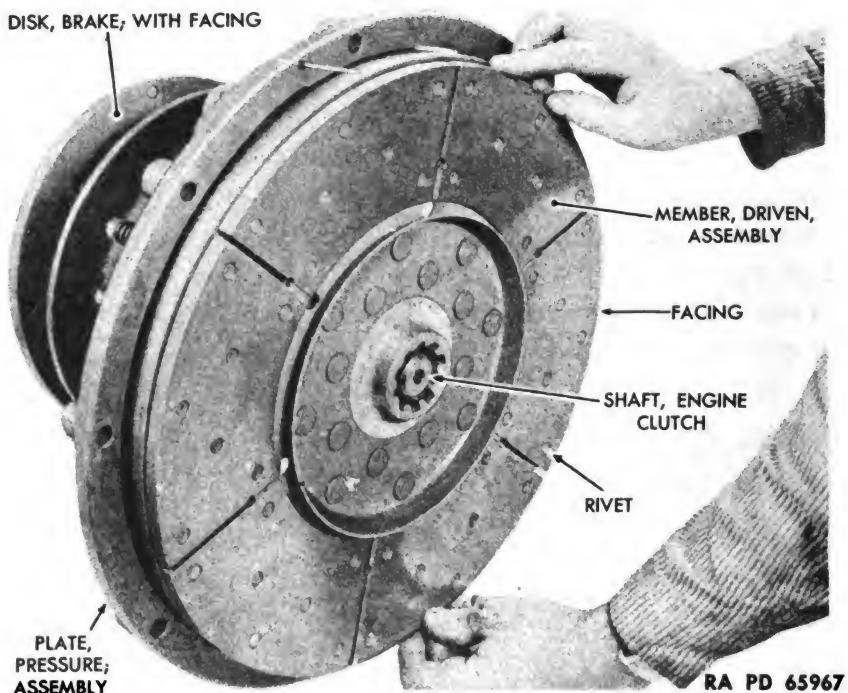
Lifting Off Engine Clutch Driven Member Assembly
